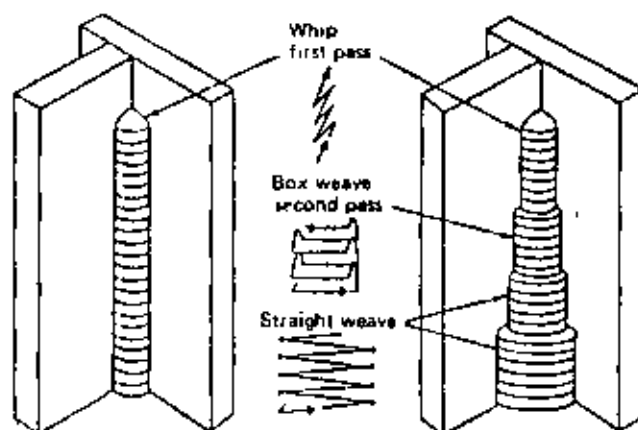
Technique for vertical welding with fast-freeze electrodes
